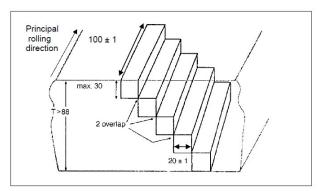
Test Specimen Location for Plates over 88 mm (3.5 in) Thick (All Dimensions in mm [1 in = 25.4 mm])
